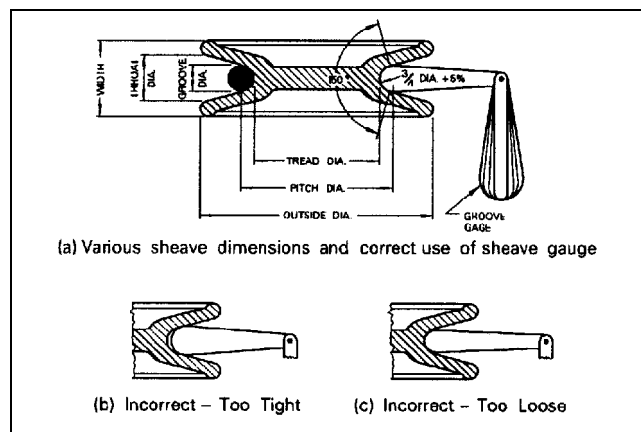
Measuring groove diameter with a Go/No-Go gauge
